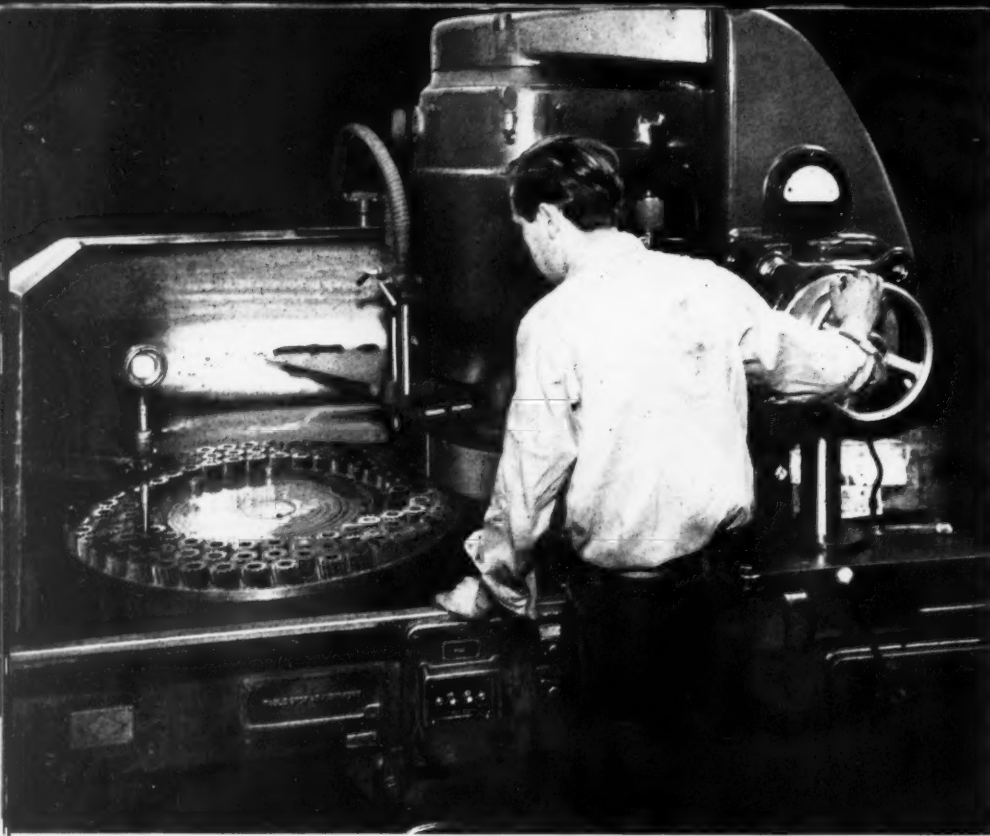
Grinding over One Hundred Oil-pump Driving Gears at One Time to the Prescribed Width within a Close Tolerance
